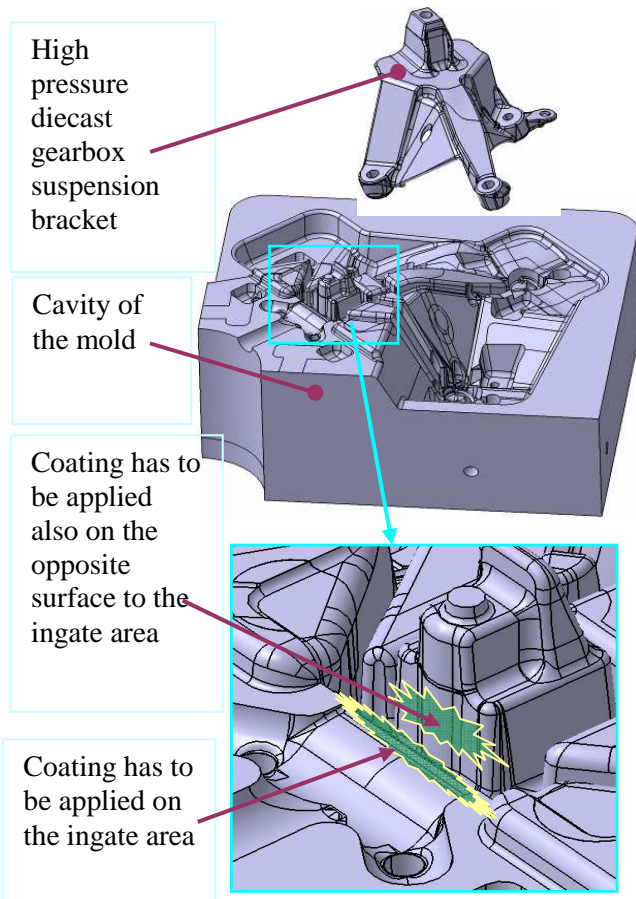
Coated areas in the case of a HPDC mould for a gearbox suspension bracket
